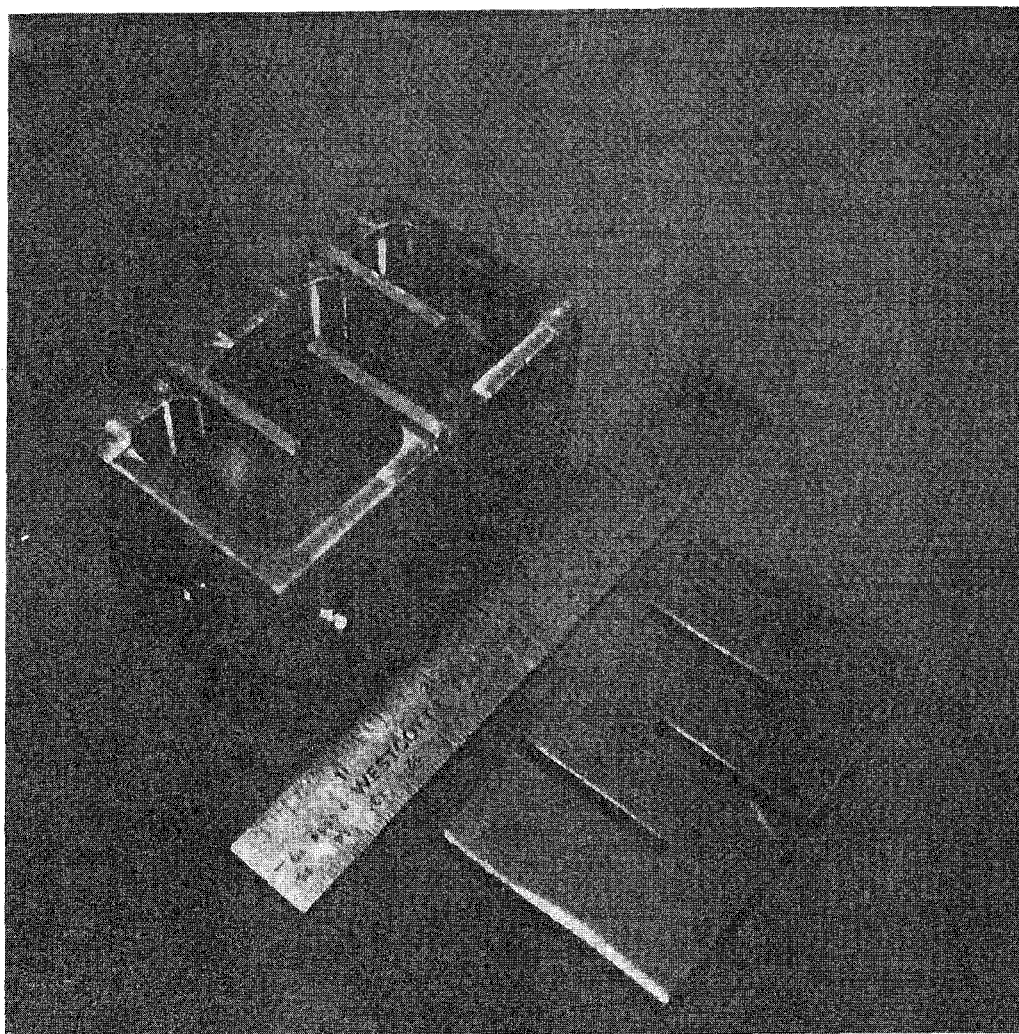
Photograph of the gas mixer showing the machined body and top before welding.
